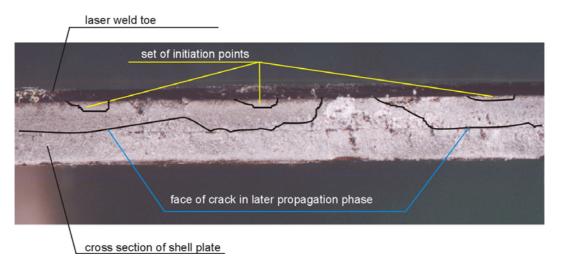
specimen A: fatigue crack fracture.
